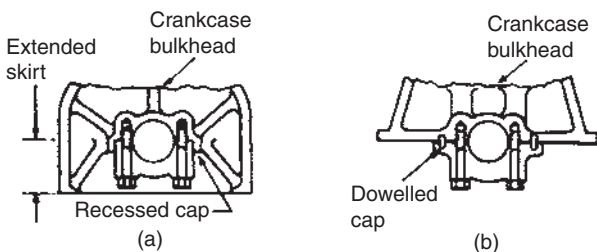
Crankcase bulkhead and main bearing cap locations
